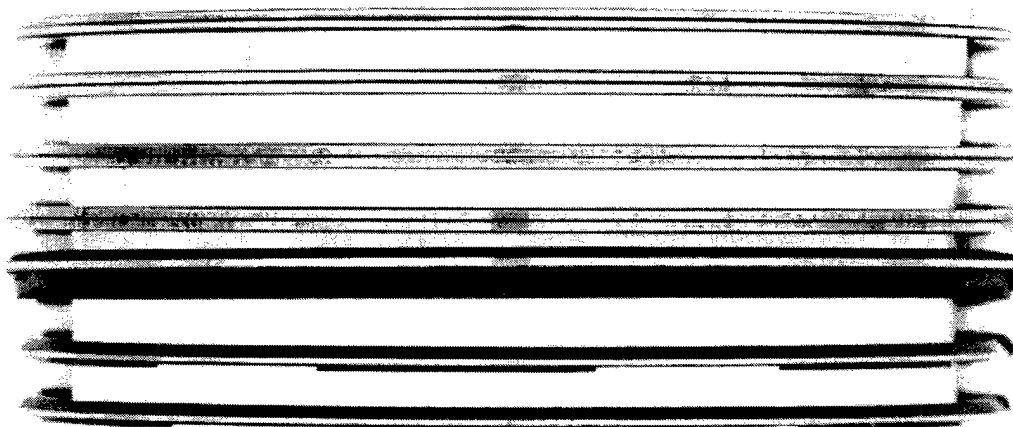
6V53T Test 39, Cylinder 1-R, Rings
